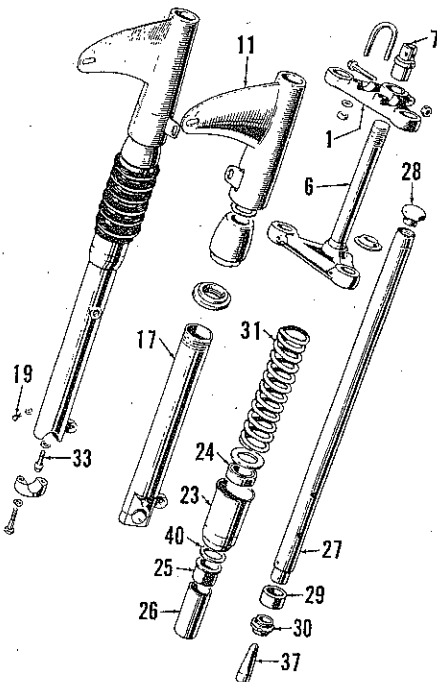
Exploded view of T20M and T20S/H front suspension unit. Refer to Fig. TM1-15—for legend.
